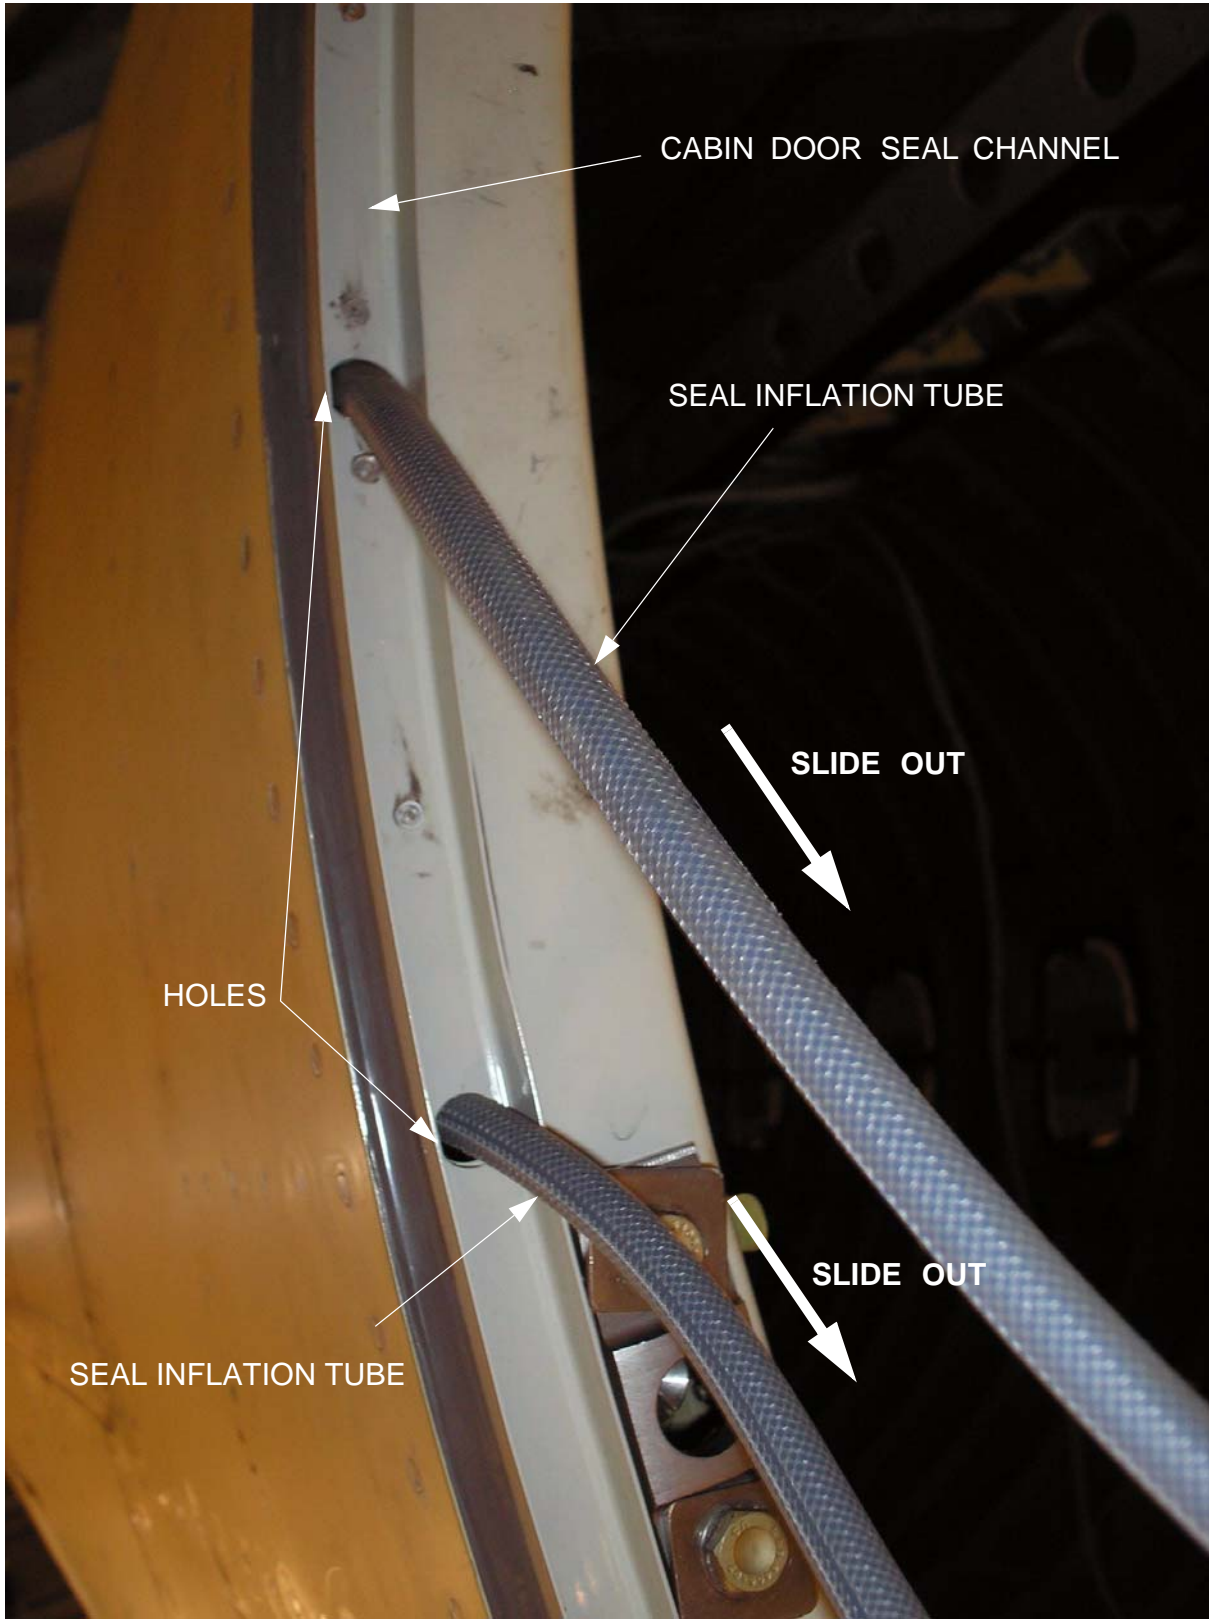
Upper Cabin Door Seal - Removal (Sheet 3 of 4)
